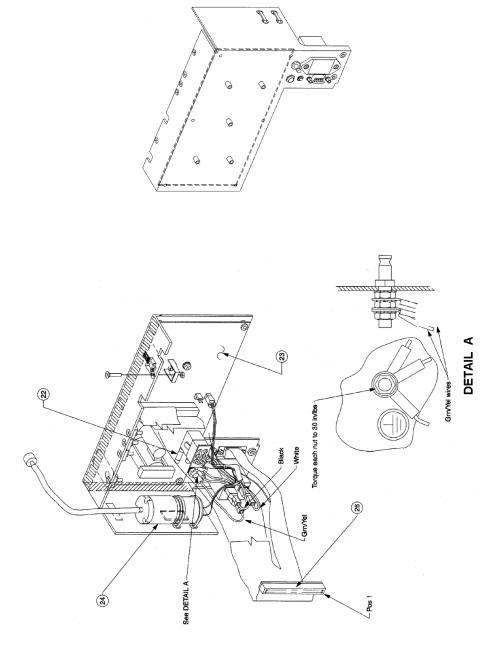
A3 Power Supply/Heat Sink Assembly Drawing
